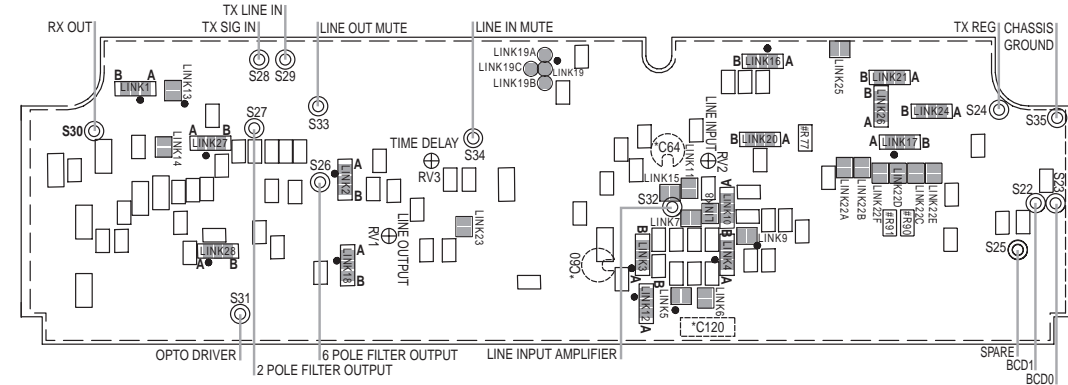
T2000-A80 PCB Links (PCB bottom side shown)
